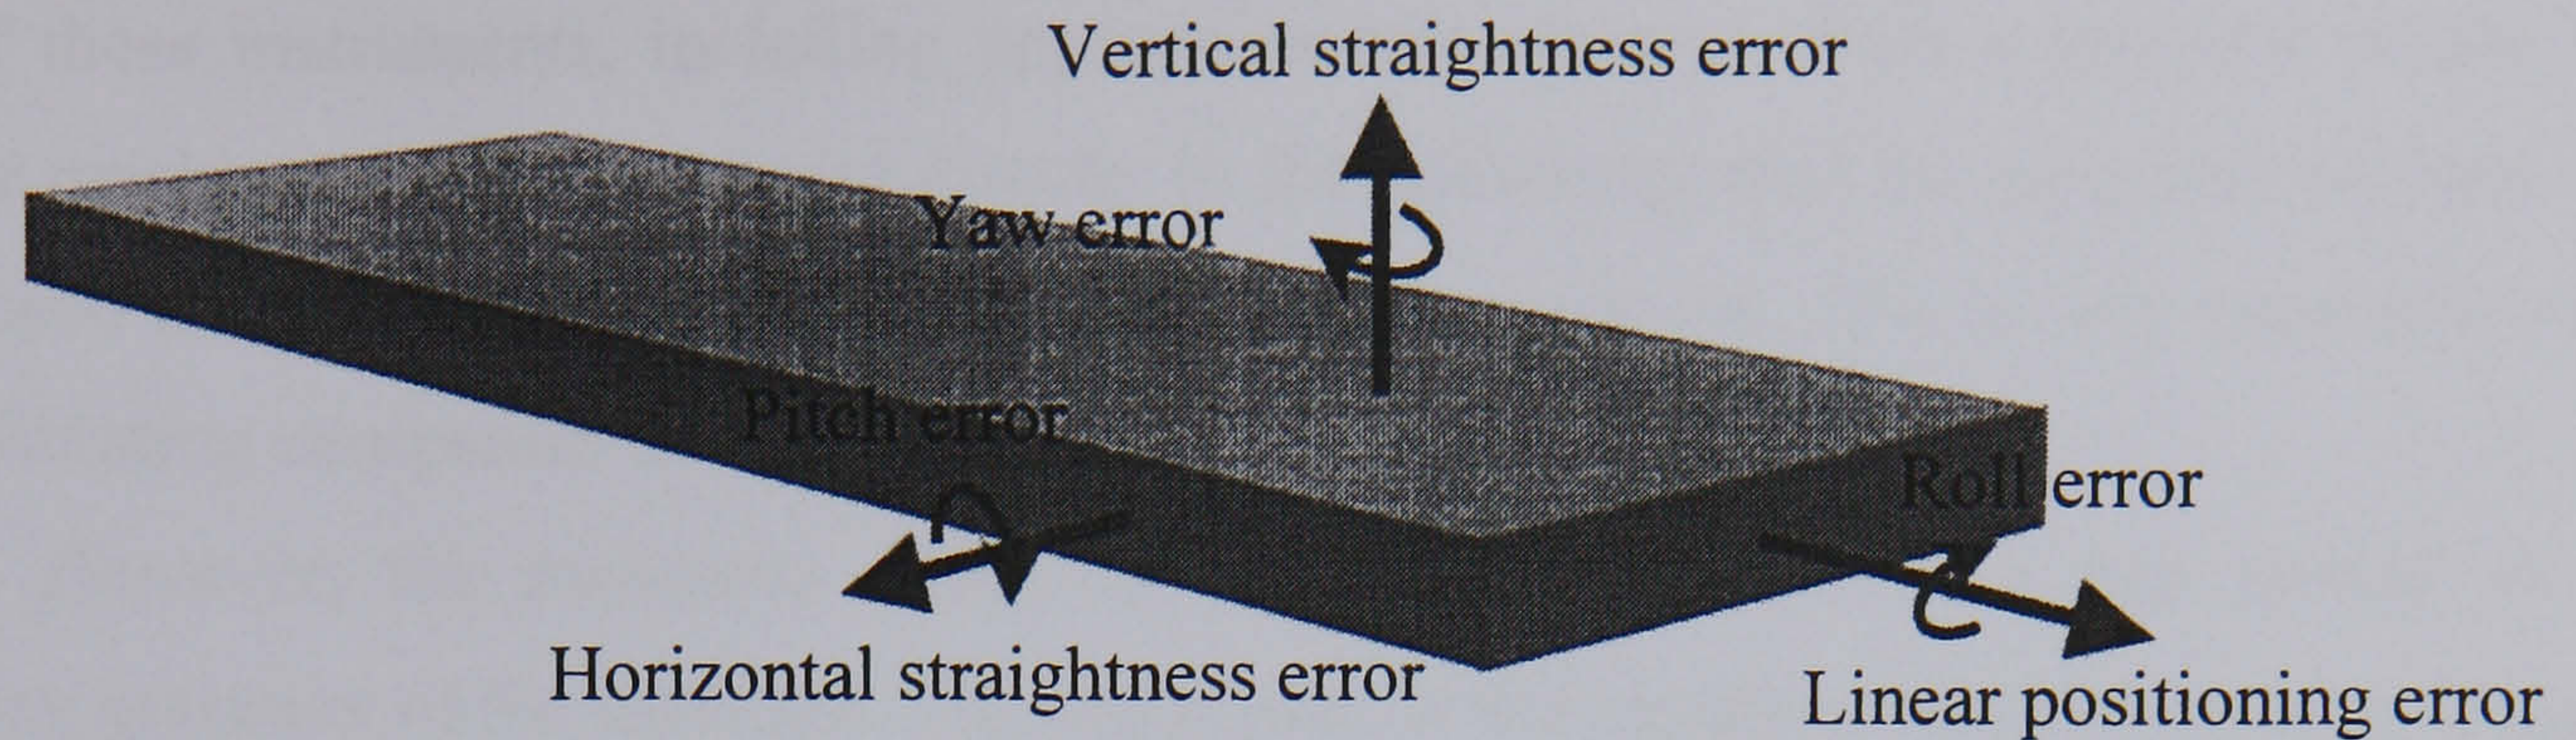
Geometric errors in a Cartesian machine tool axis
